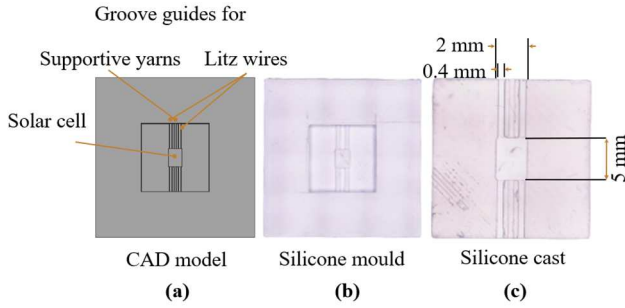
Stages of creating the mold using a two-part master mold. (a) Designing the CAD model in software. (b) 3D printing the master mode. (c) Casting the mold with silicone.
